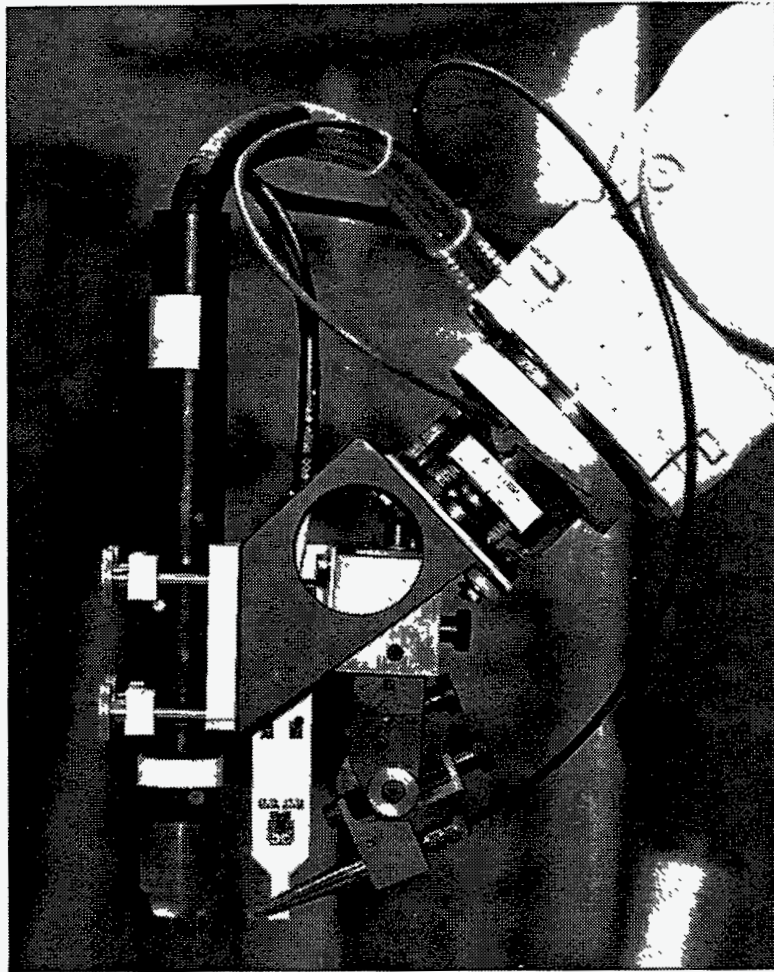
MAST Sensor Interfaced With Welding Torch and Wire Feeder Guide
